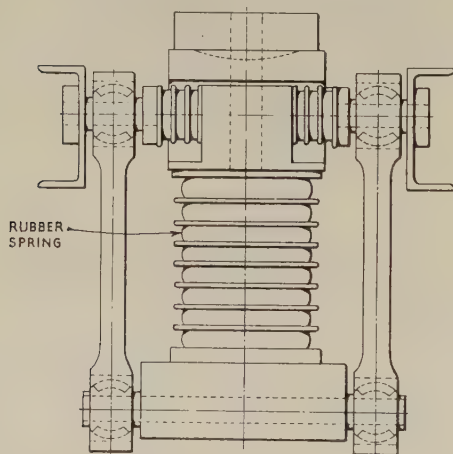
Swing bolster with rubber bolster springs and thrust blocks, and with Spherilastik bearings in the swing links.
